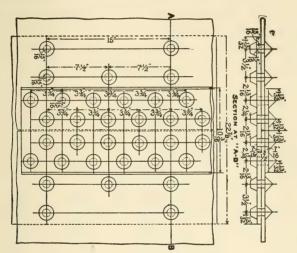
QUADRUPLE RIVETED BUTT-JOINT.
